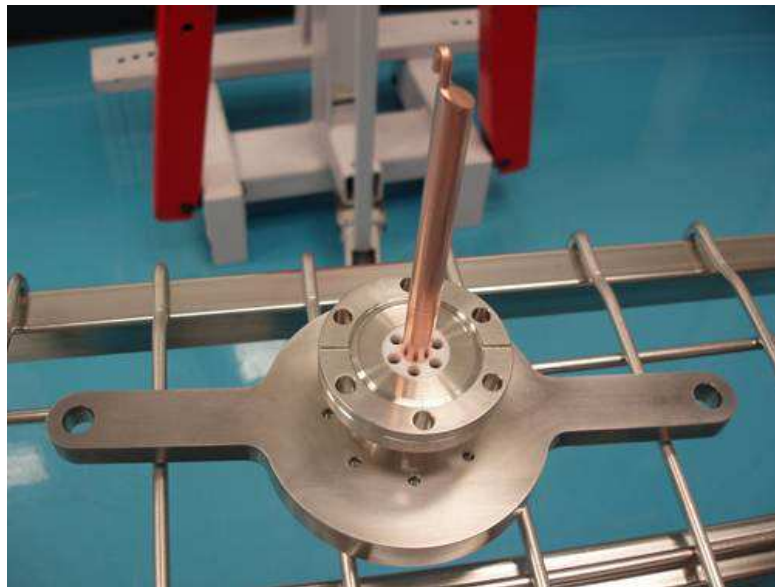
Completed rf input coupler for the TE cavities after final assembly.
